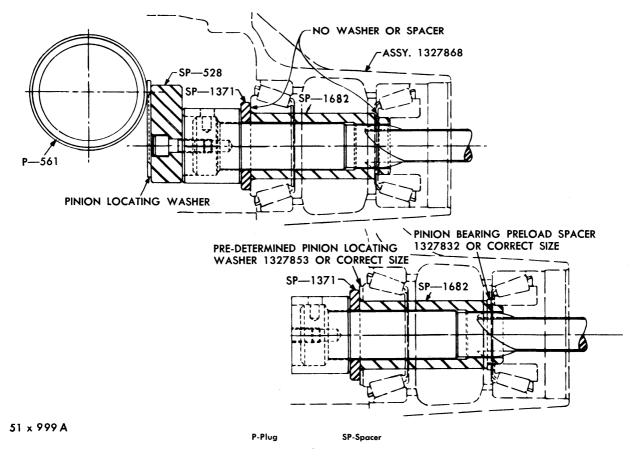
Setting Pinion Bearing Pre-Load with Tool C-758-D2
